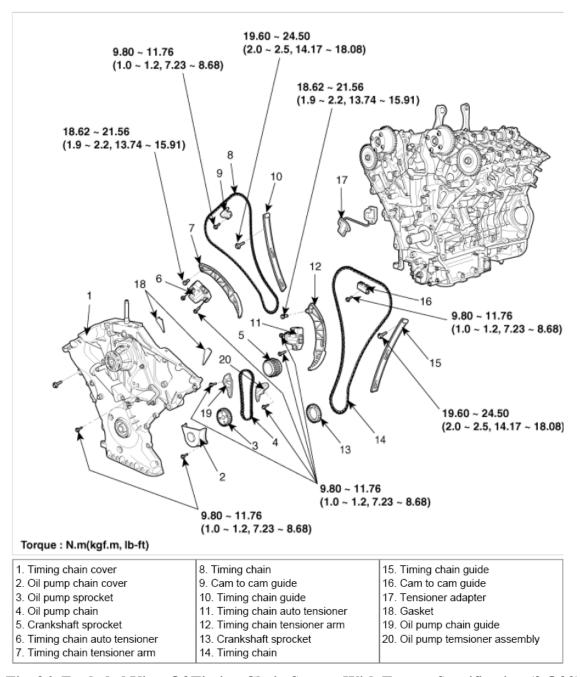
Exploded View Of Timing Chain System With Torque Specification (2 Of 2)
